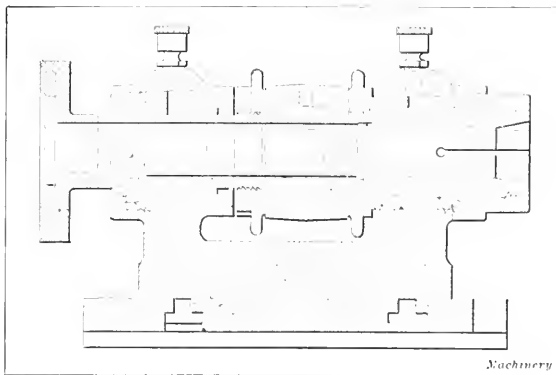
Cross-sectional View of Headstock of "Capital" Internal Grinder
